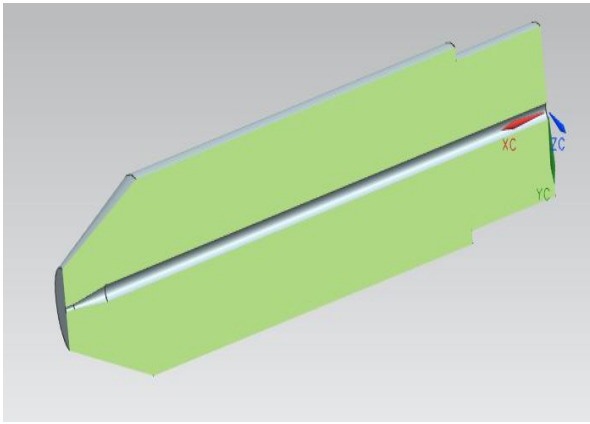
Sectional vie showing the outer and inner part of the fluid entrance and discharge sections.
